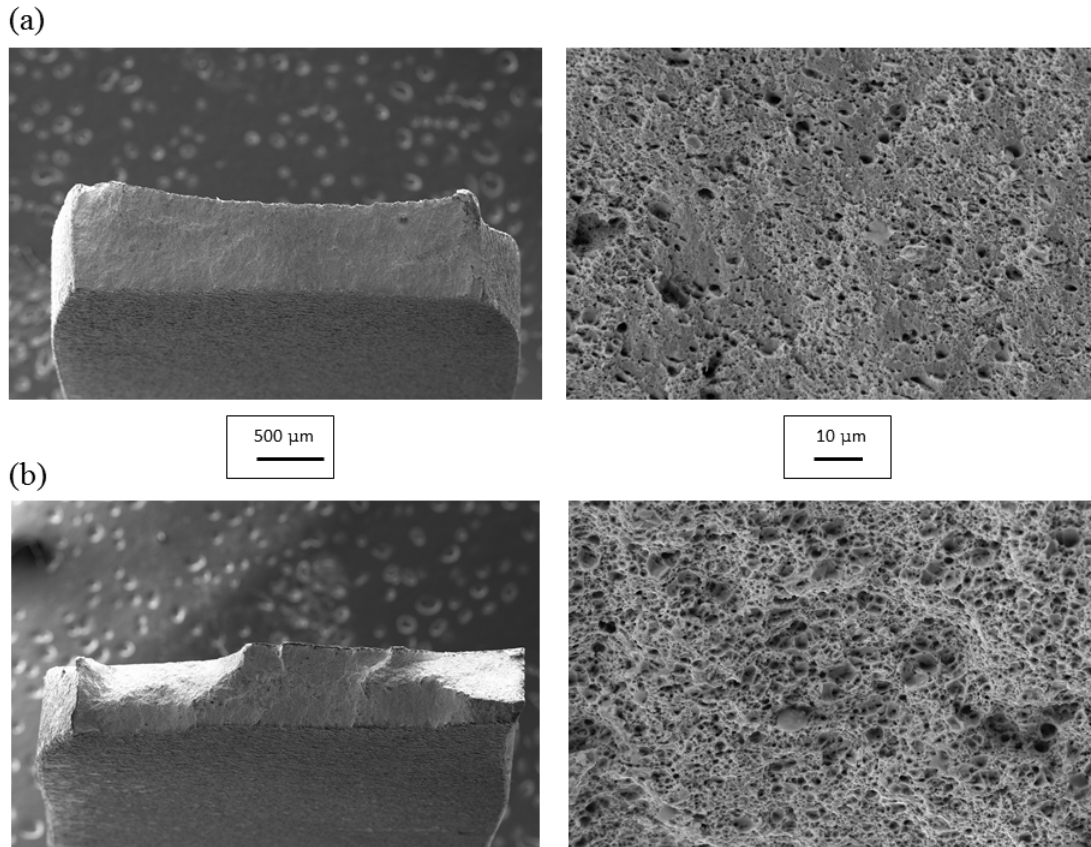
Fractography of MA956 fractured in (a) air at 328°C and (b) molten lead at 328°C showing similar failure.
